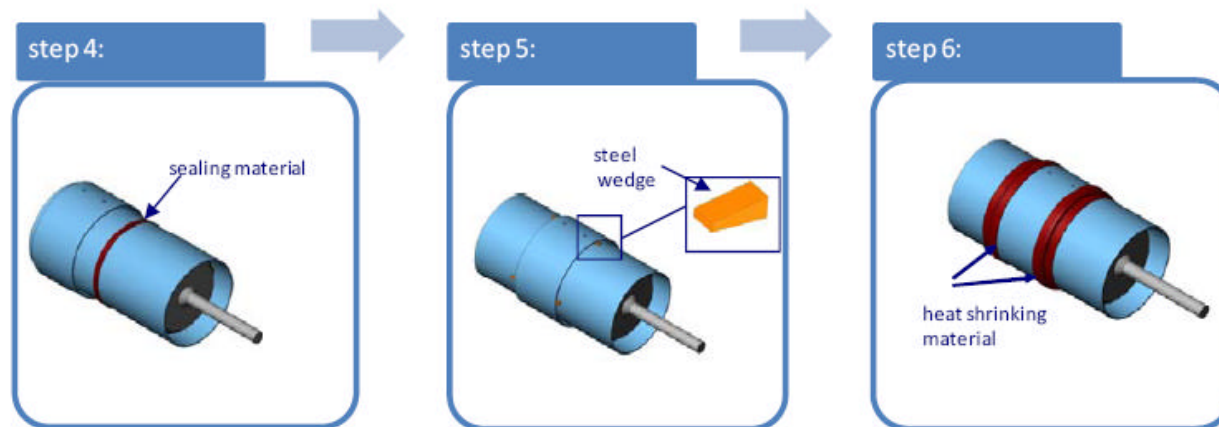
Concept for pipe joining using adhesive bonding (step 4 - 6)
